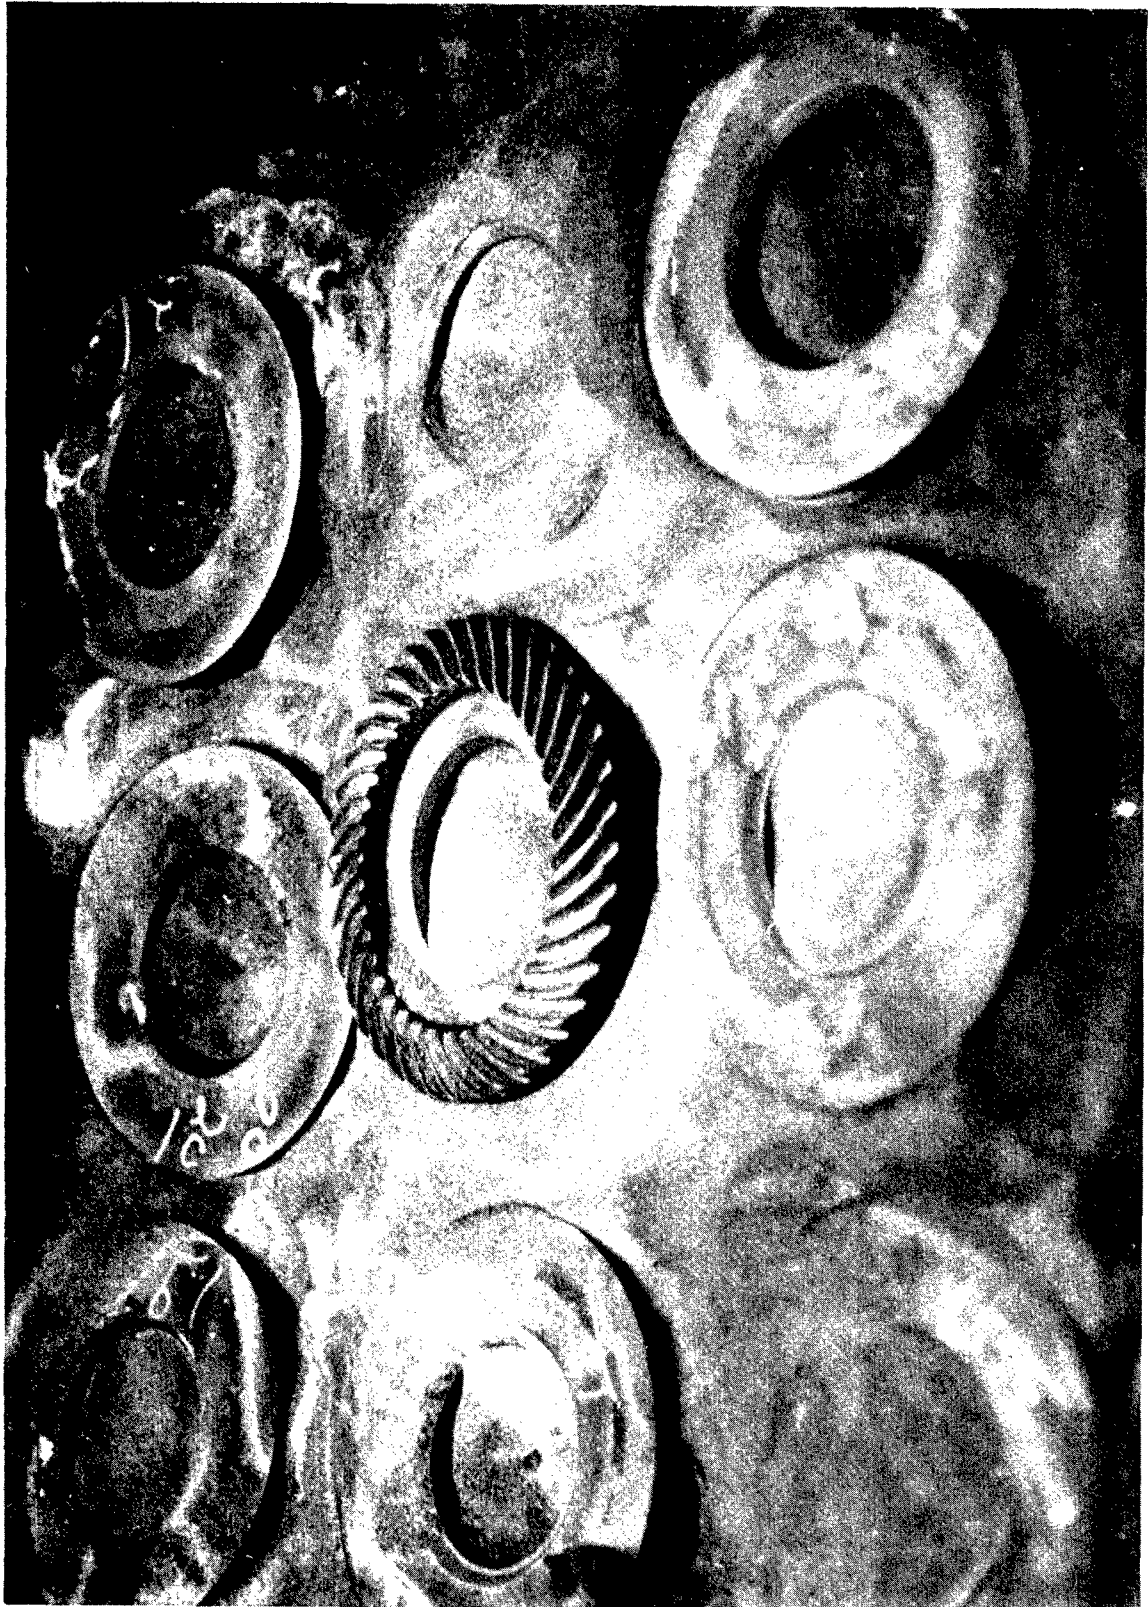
Forged Gears Cooled (Face Down) in a Sand-Graphite Mixture
